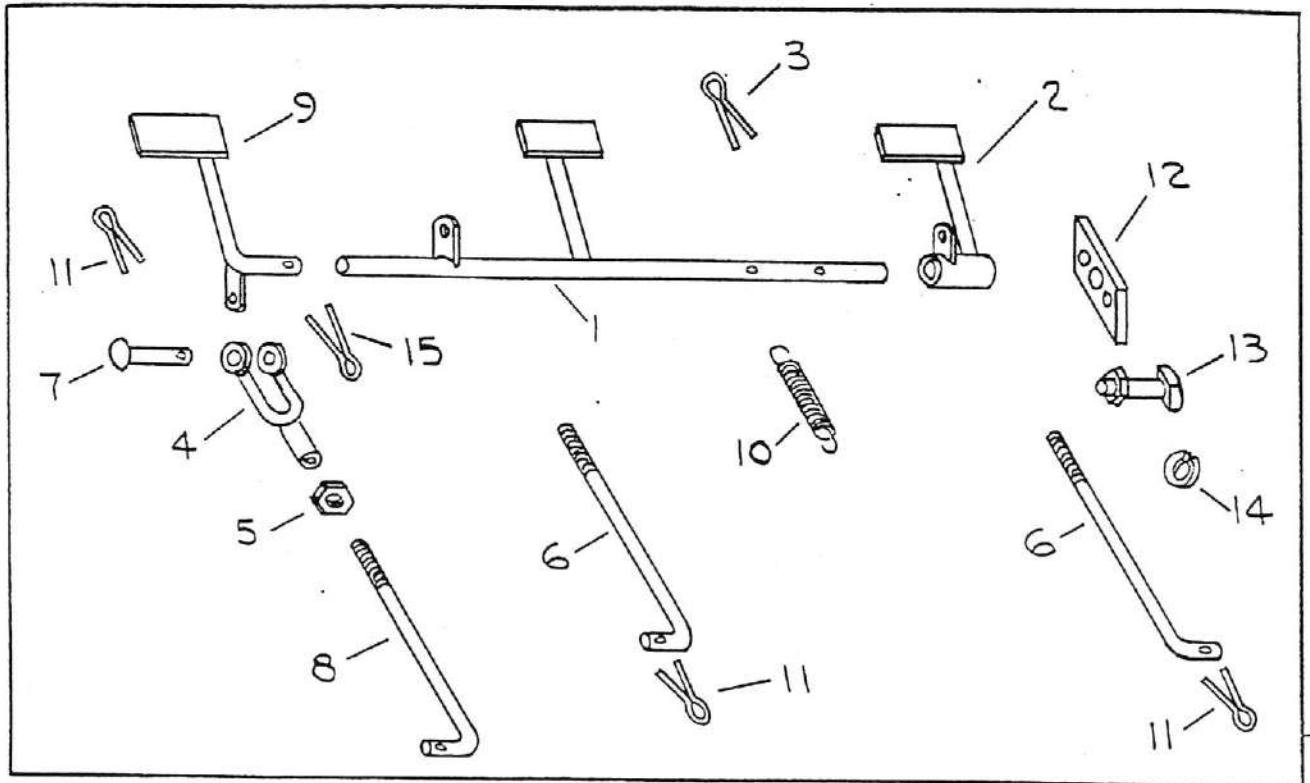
Brake Rod — Clutch Rod & Cross-Shaft Assembly
